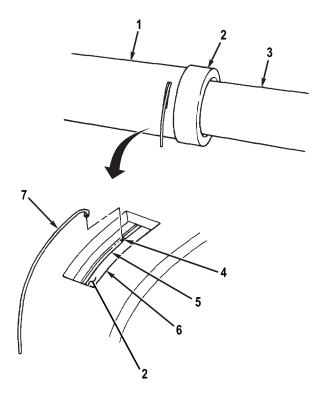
Hydraulic Lift Cylinder (without Side Lift Kit) Lockwire Assembly.
